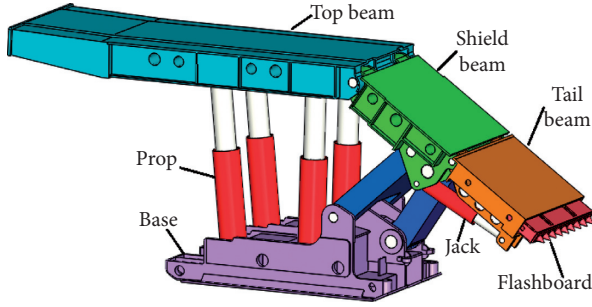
Assembly body of the top coal caving hydraulic support.
